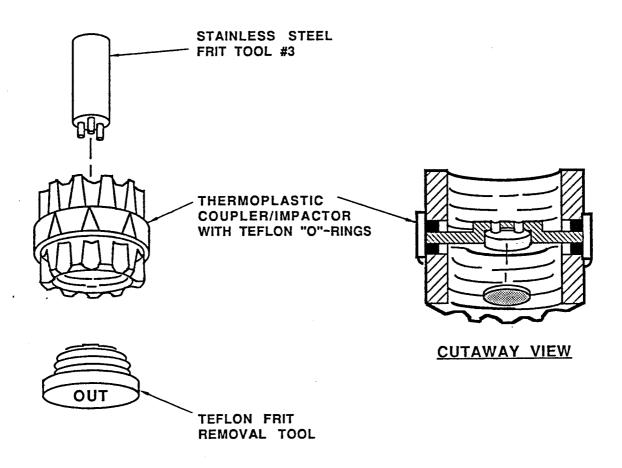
Side View Impactor/Coupler Assembly with Disc Removal Tools
